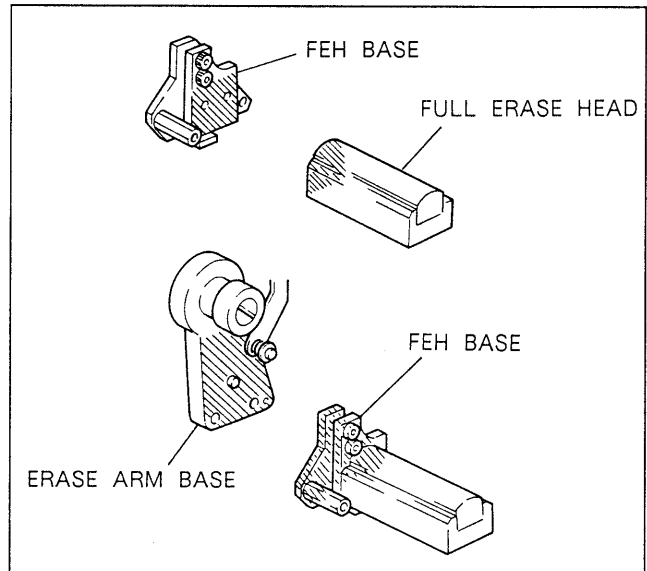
Cleaning of each Mounting Surfaces
